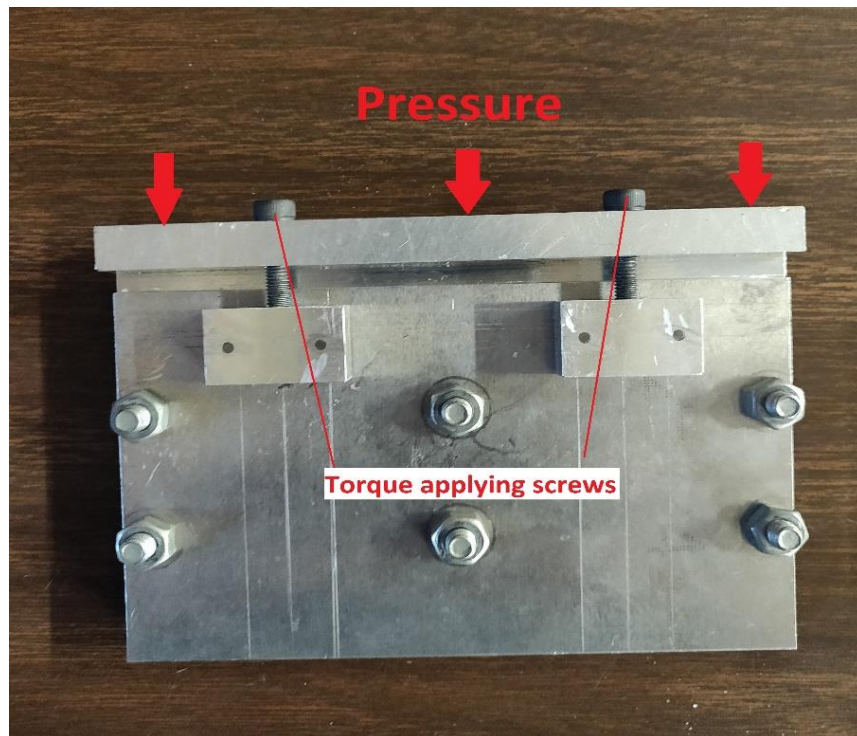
Uniaxial pressure being applied on the test specimens using a fixture.
